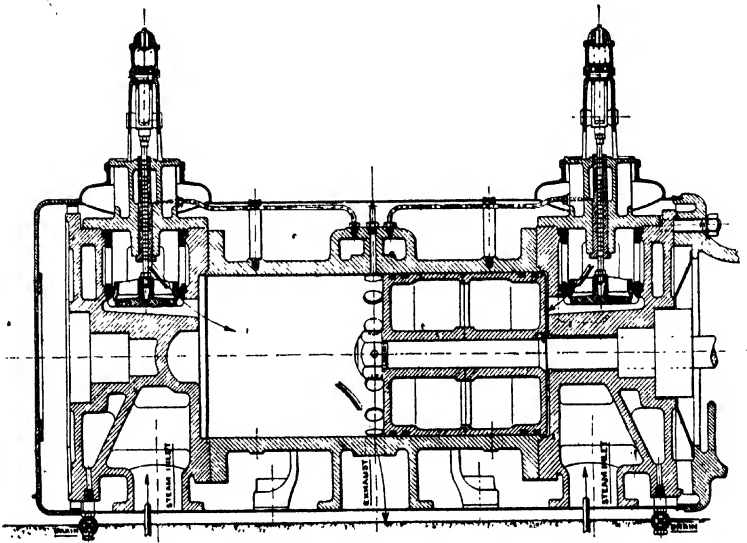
A.—SECTION OF CYLINDER OF UNIFLOW STEAM ENGINE
